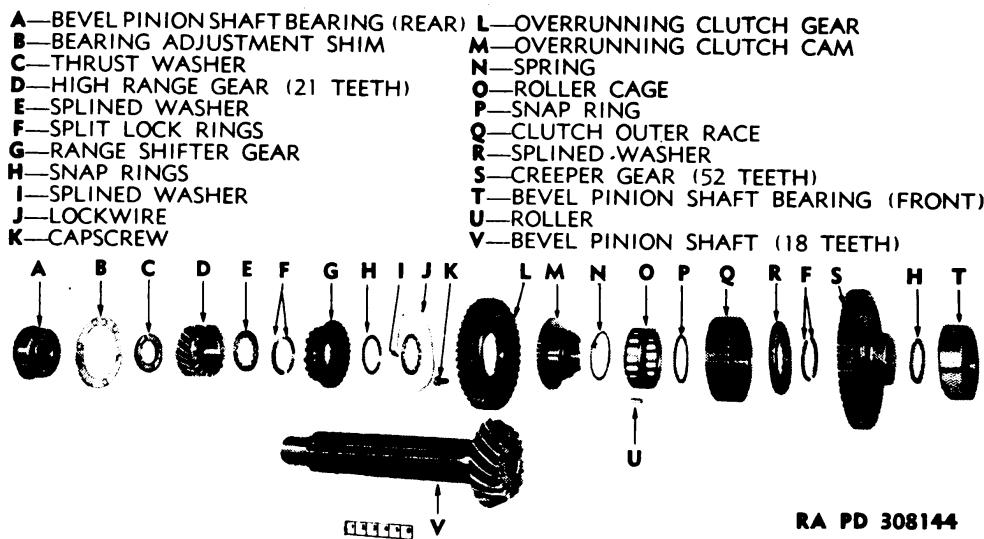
Bevel Pinion Shaft and Gears Disassembled
